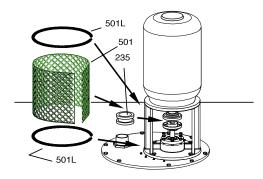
Coupling guard reassembly 15. Lubricate the pump bearings.
